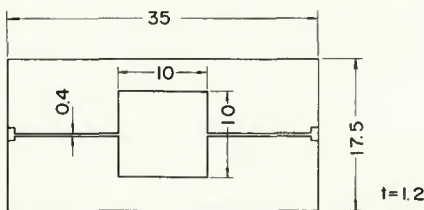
Thick film substrate test piece (measurements shown in mm)
